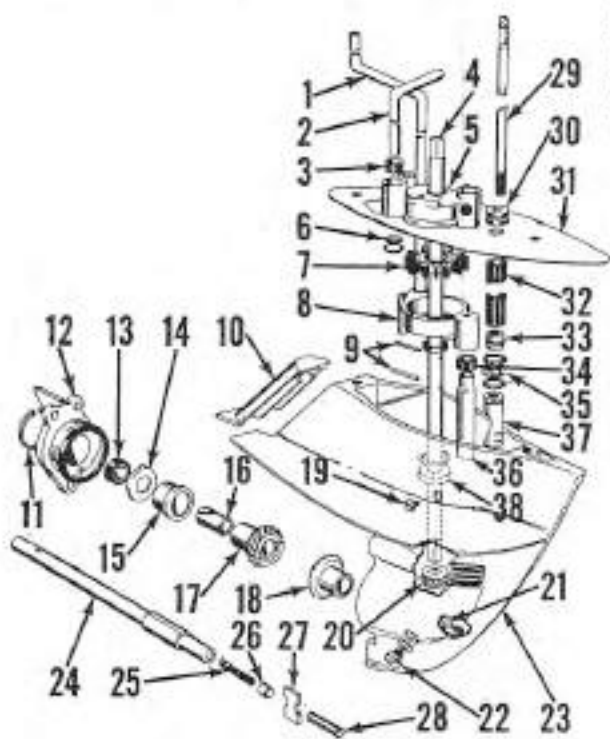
Exploded view of lower unit gearcase, water pumps and associated parts used on Fishing Scott except some 1963 models. Refer also to Fig. Mc68A.
